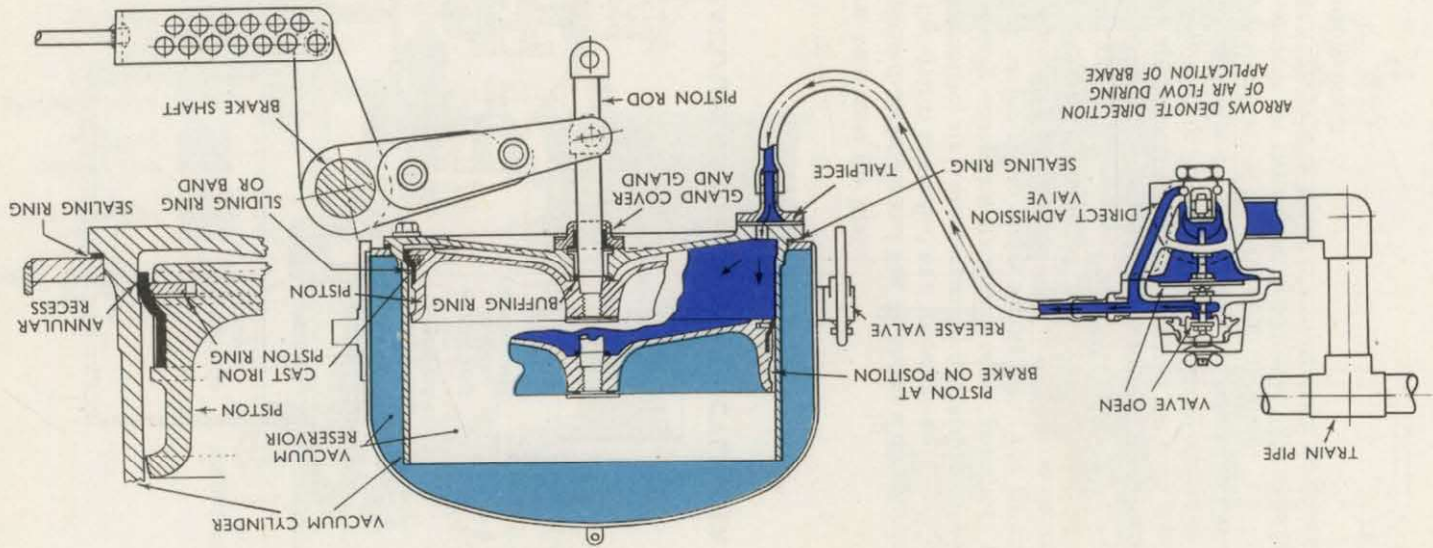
VACUUM BRAKE SEPARATE CYLINDER
